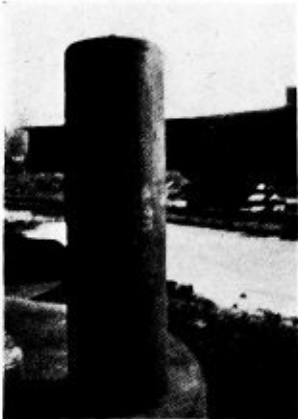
Electrically Welded Receiver Before Testing
